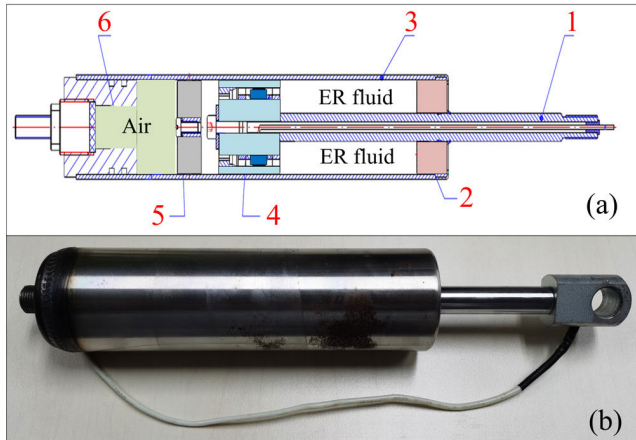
(a) Design of the ER damper (1. piston rod, 2. top cover, 3. casing, 4. electrode, 5. floating piston, 6. bottom block) and (b) photograph of a prototype.
